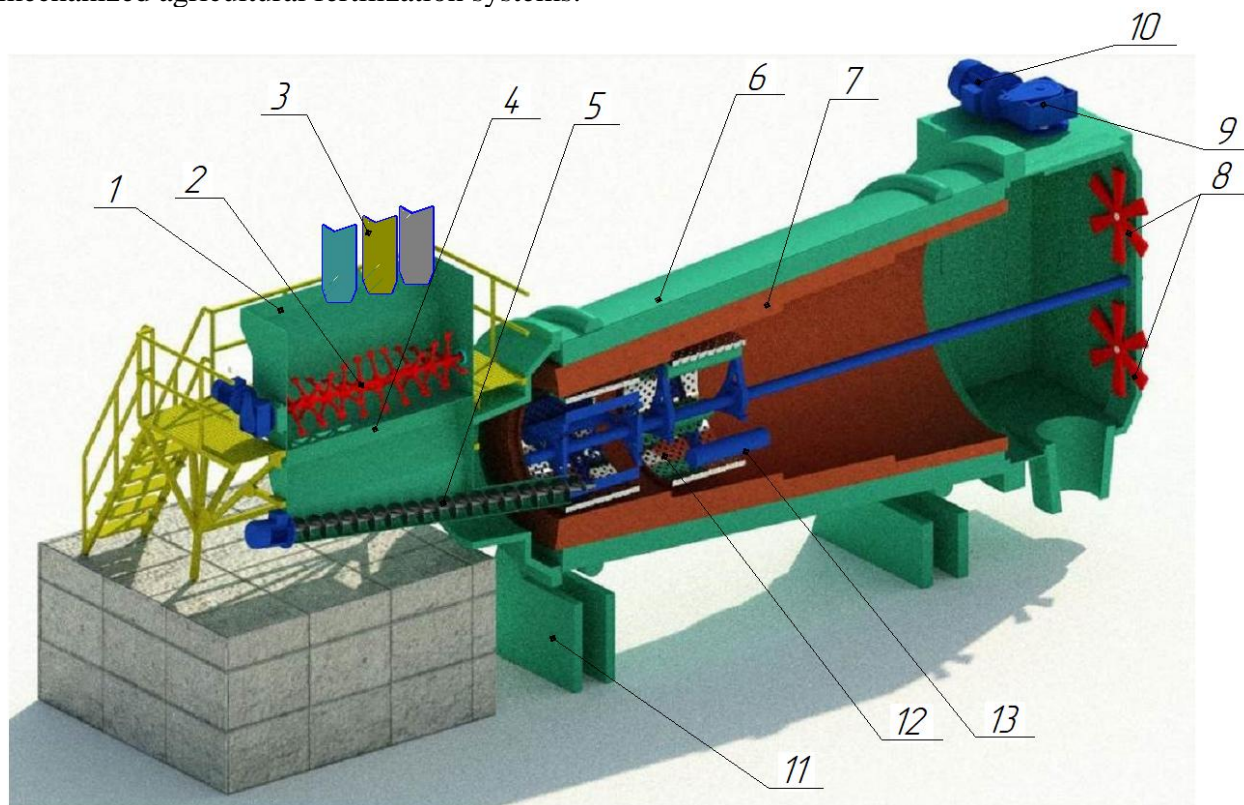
3D model of a machine for producing granulated fertilizers from organic sapropel: 1 – hopper; 2 – mixer; 3 – dispensers; 4 – gate; 5 – screw conveyor; 6 – drum housing; 7 – drying surface with ceramic coating; 8 – fans; 9 – gearbox; 10 – electric motor; 11 – supports; 12 – rollers; 13 – perforated cylinder.
